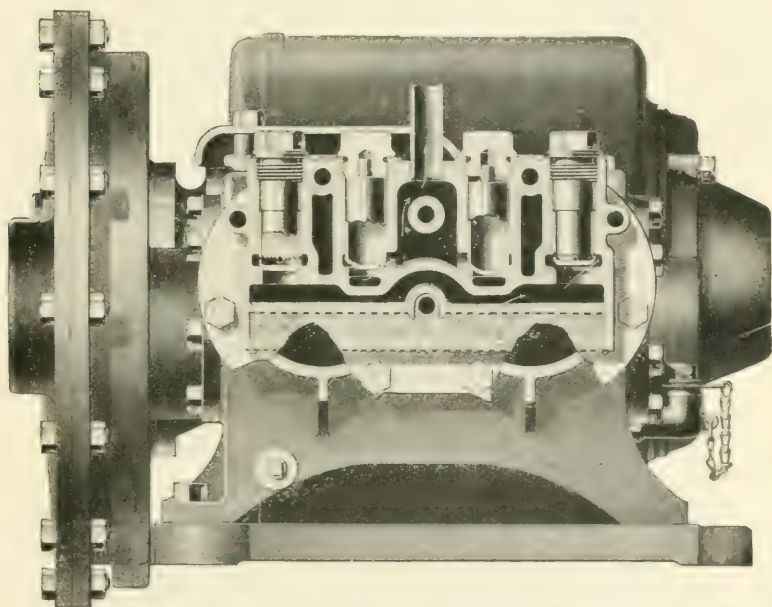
VERTICAL SECTION THROUGH THE VALVE CHAMBERS OF THE COMPRESSOR SHOWN IN FIG. 21
